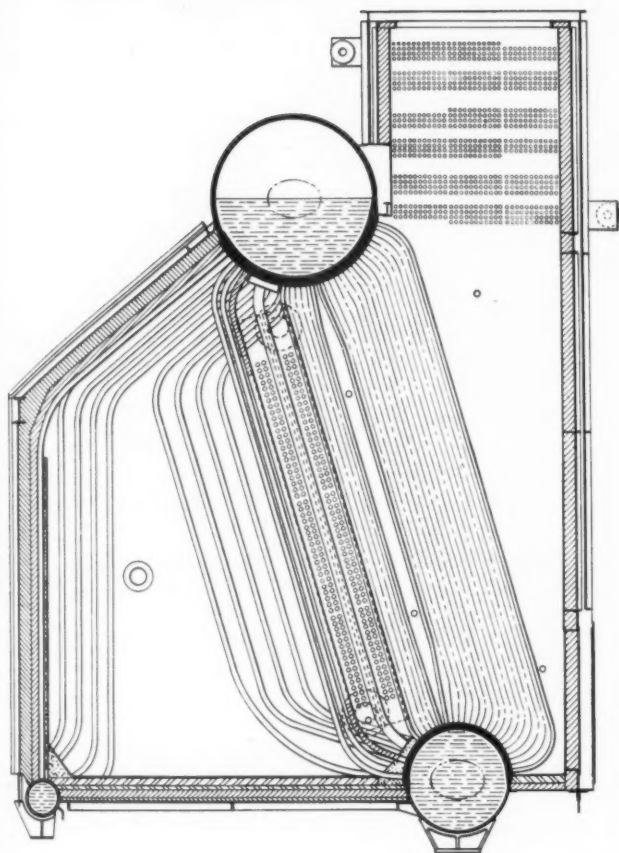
FRONT-VIEW SECTION OF TWO-DRUM BOILER WITH SUPER-HEATER AND ECONOMIZER
